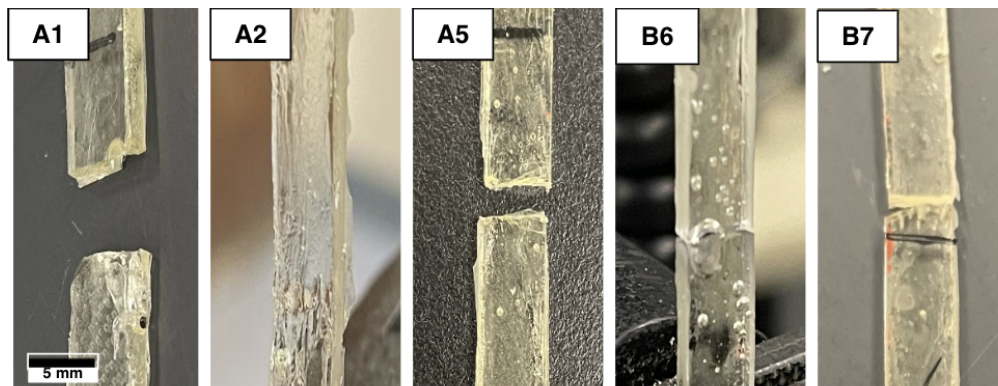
Fracture Locations: fracture at bubble (A1), fracture with incomplete curing (A2), fracture at desired location (A5), fracture at bubble (B6), fracture at grips (B7)
